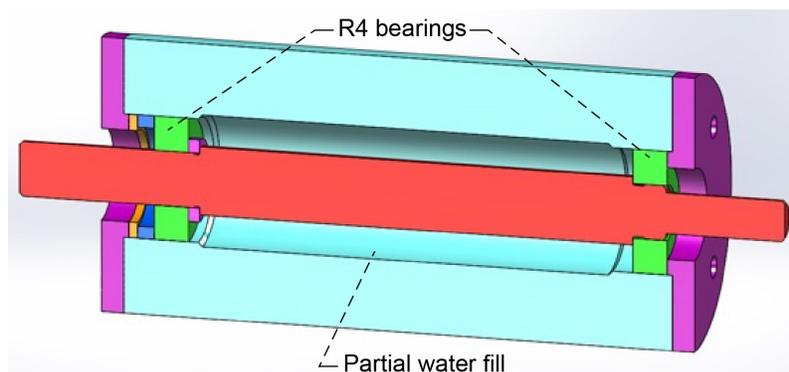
Cross-sectional schematic of bearing corrosion test setup.
